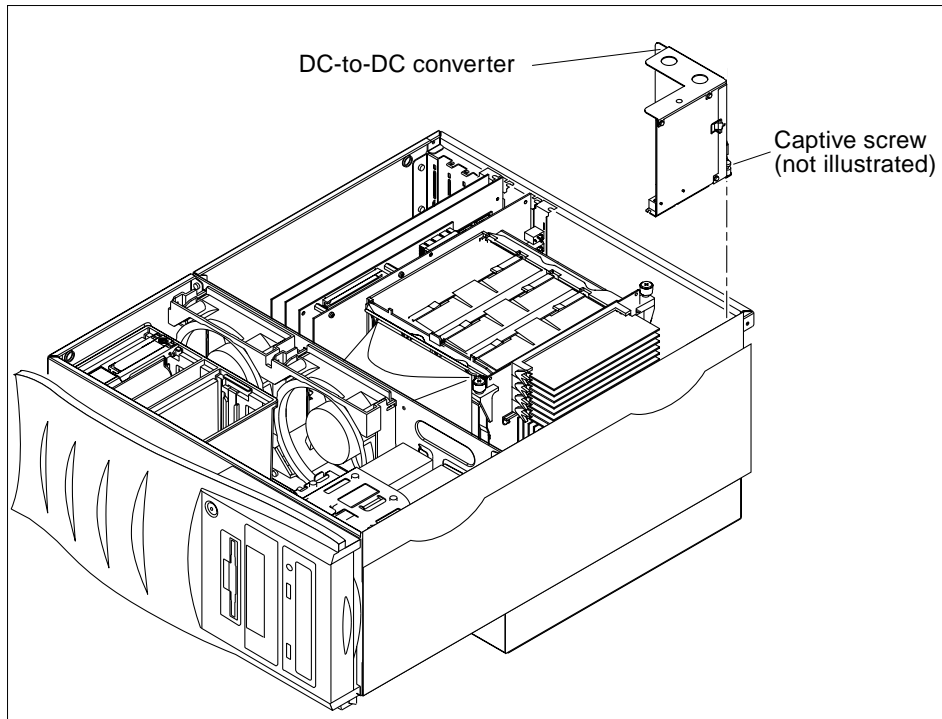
Removing and Replacing the DC-To-DC Converter Assembly
